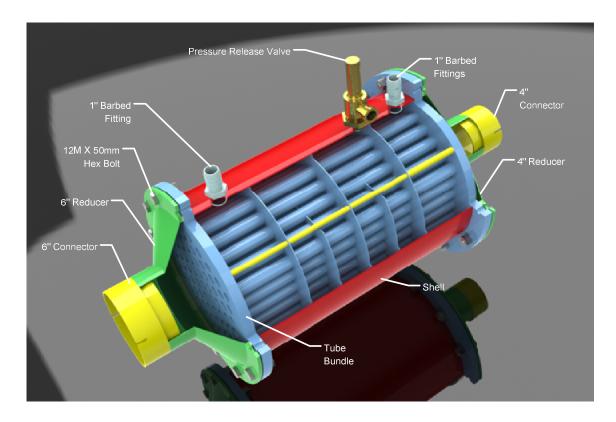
CUT AWAY VIEW OF SHELL AND TUBE HEAT EXCHANGER
